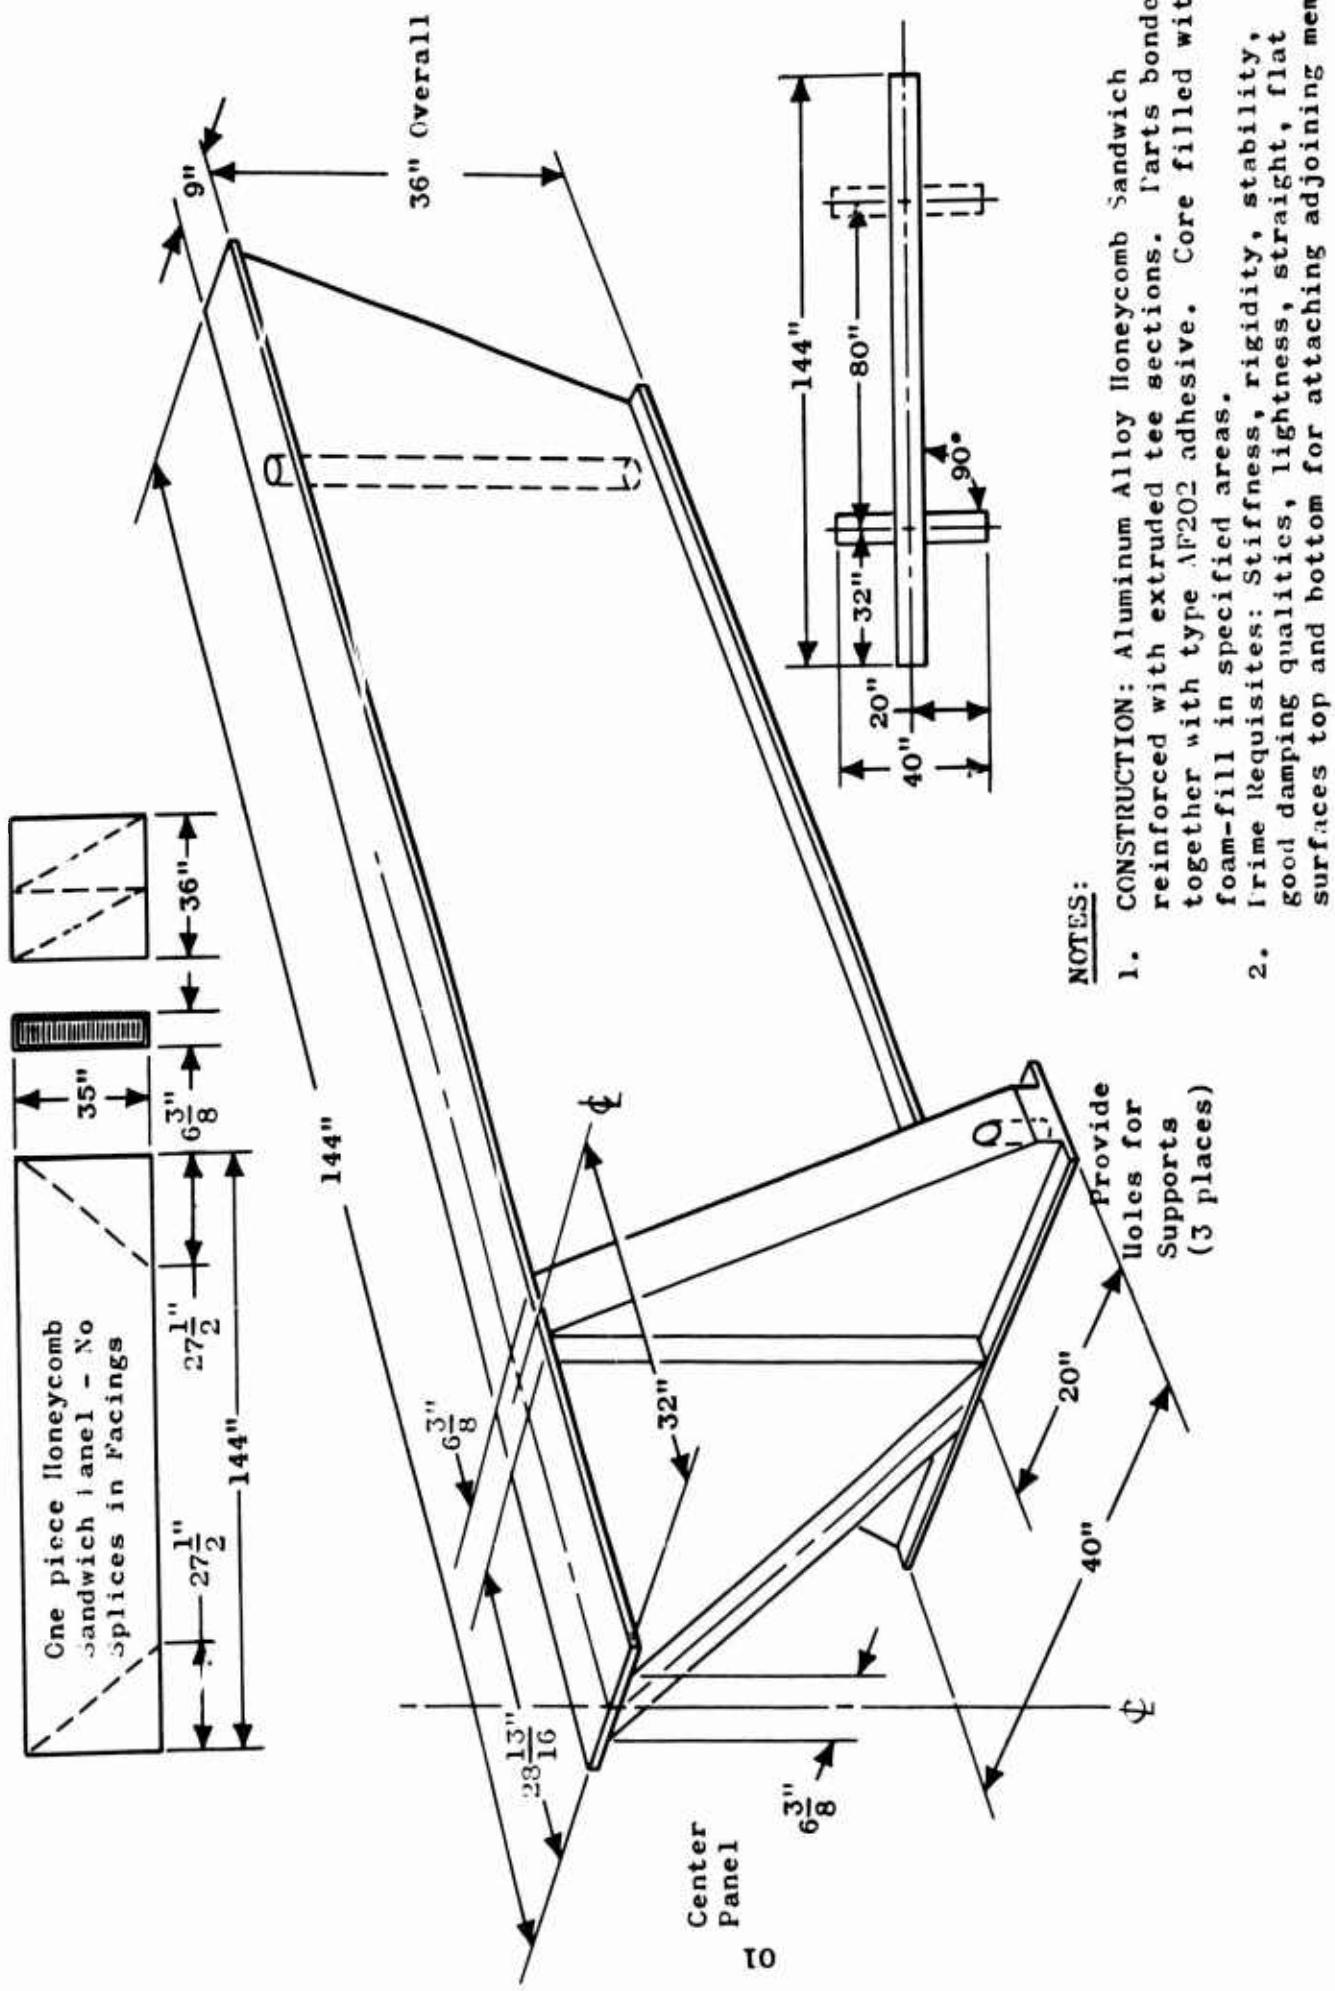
Stand Sub-Assembly, TD7-1076B Sheet 1
